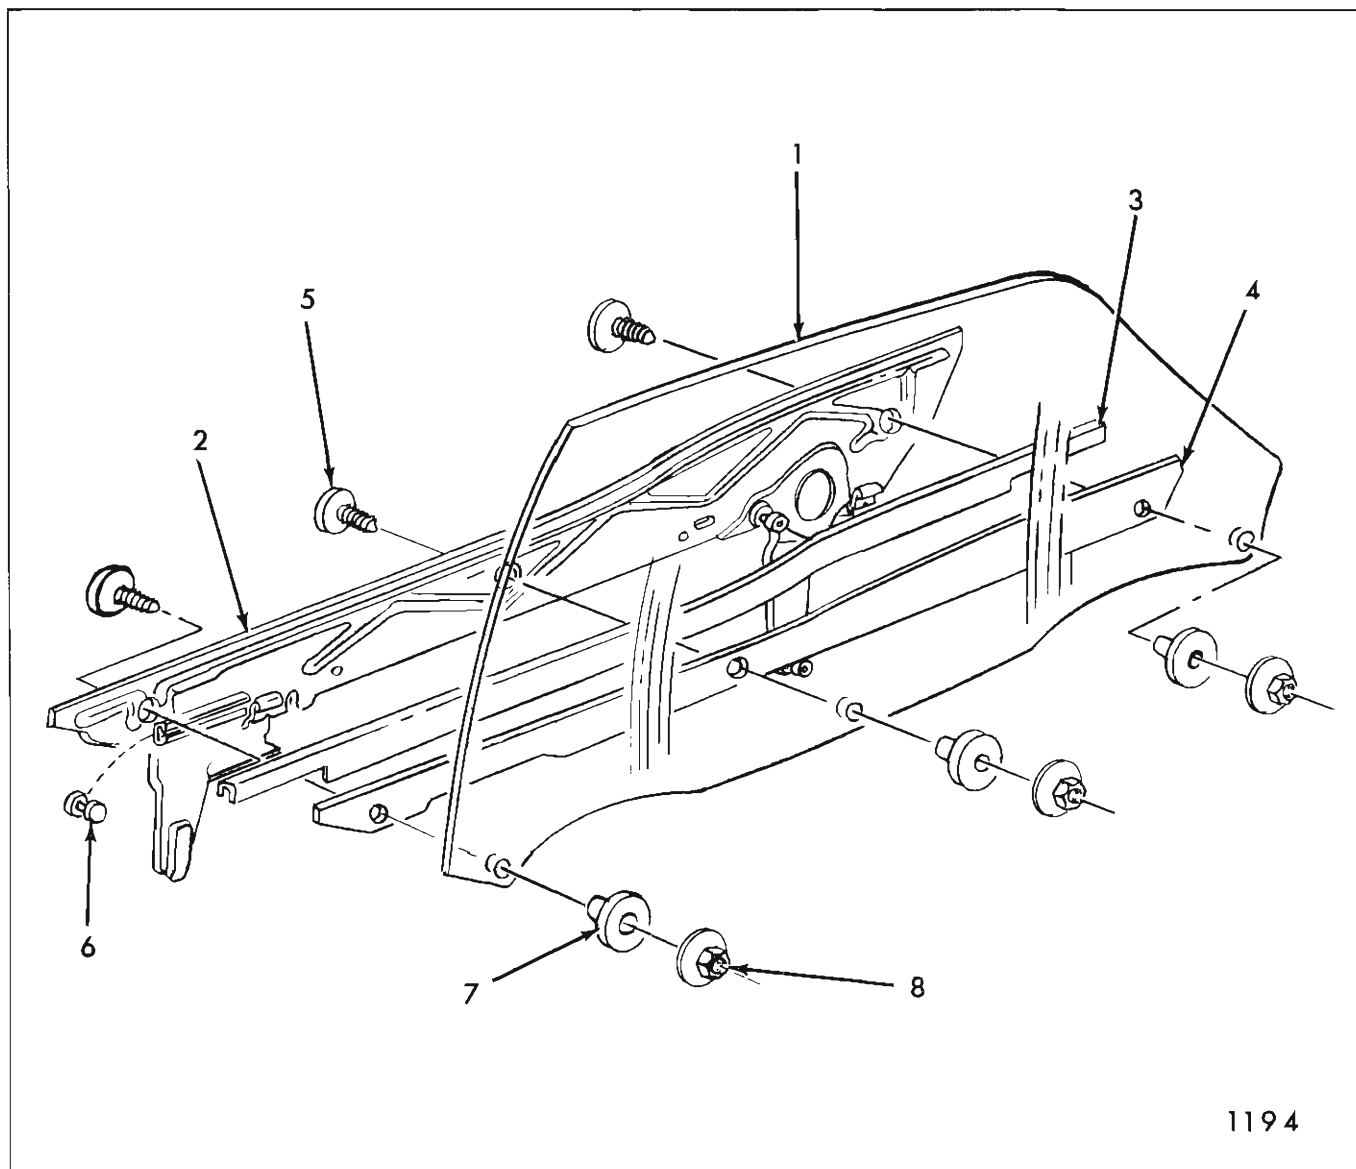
D60—Rear Door Window Assembly 38-48-68000 Series Except 68069
